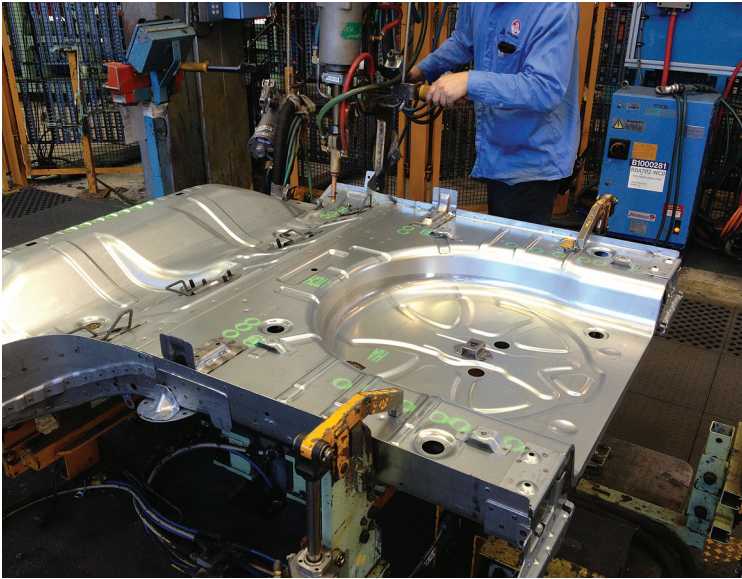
SAR annotations indicating locations for spot welds in an industrial scenario. CAD models are loaded into the SAR system, making this approach fit within existing engineering processes.
